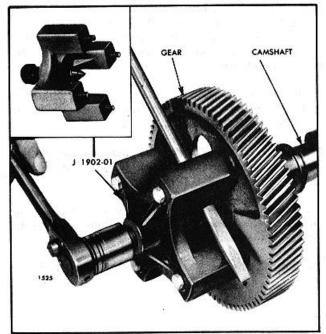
Removing Gear (Camshaft or Balance Shaft Gear Puller J 1902-01)
